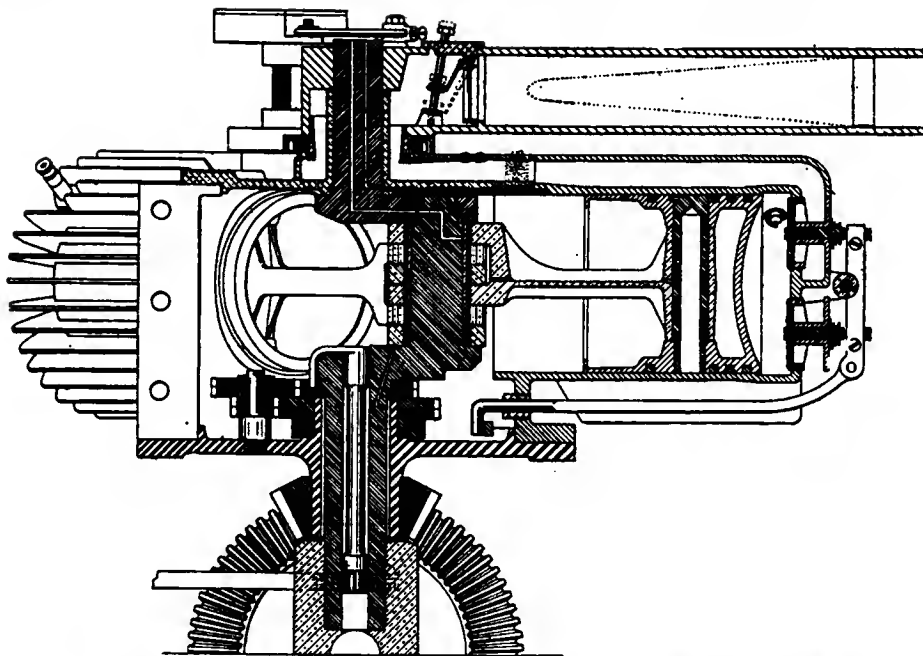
PART SECTIONAL DRAWING OF ONE-CYLINDER OF ADAMS-FARWELL MOTOR.
